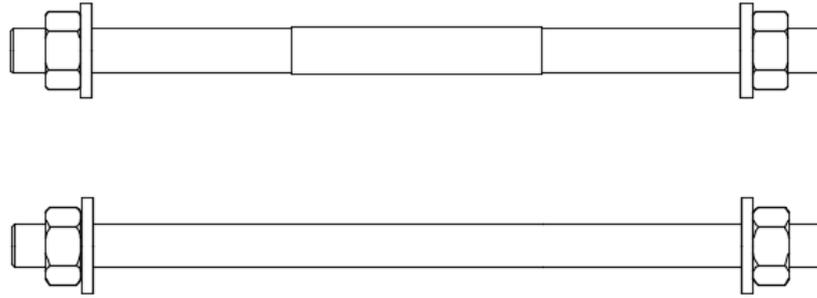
Test specimens that were made from HPM (top) and PPM bolts. HPM bolts have threads in both ends and PPM bolts have threads through the whole length. Two nuts and washers were manufactured for each bolt.
